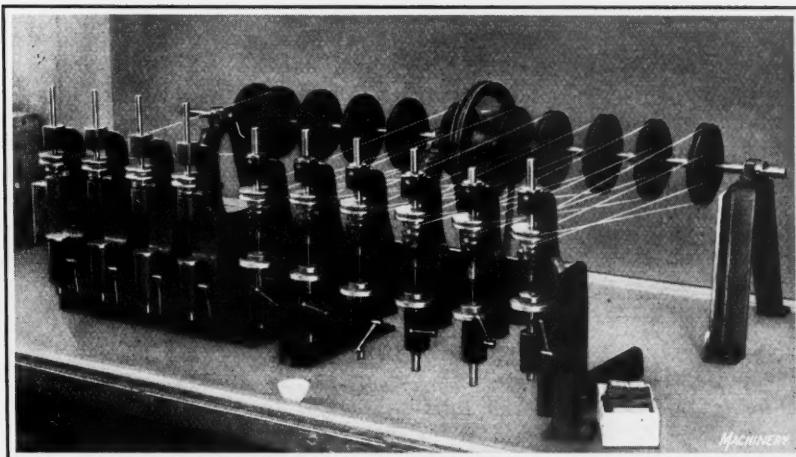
Multiple-spindle Machines for bell-mouthing both Ends of the Tapered Drawing Hole
